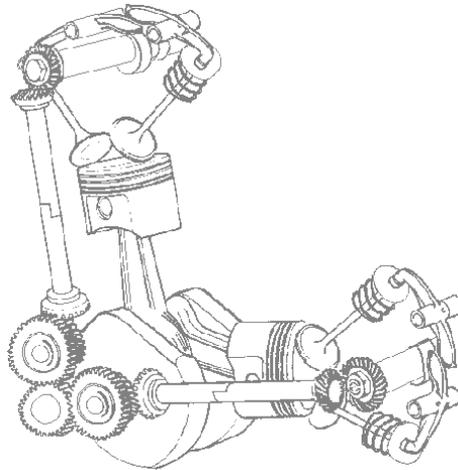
Dampened compound gears of Cosworth's CA engine (Bamsez, 2013)
